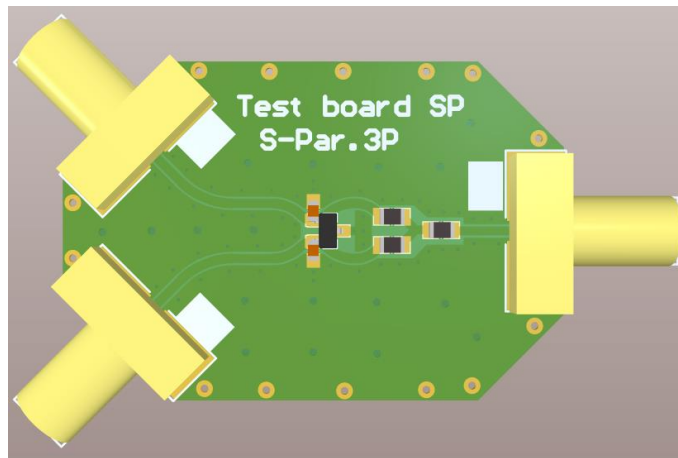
Example Test fixture S-Parameter measurement - single ended, top layer
